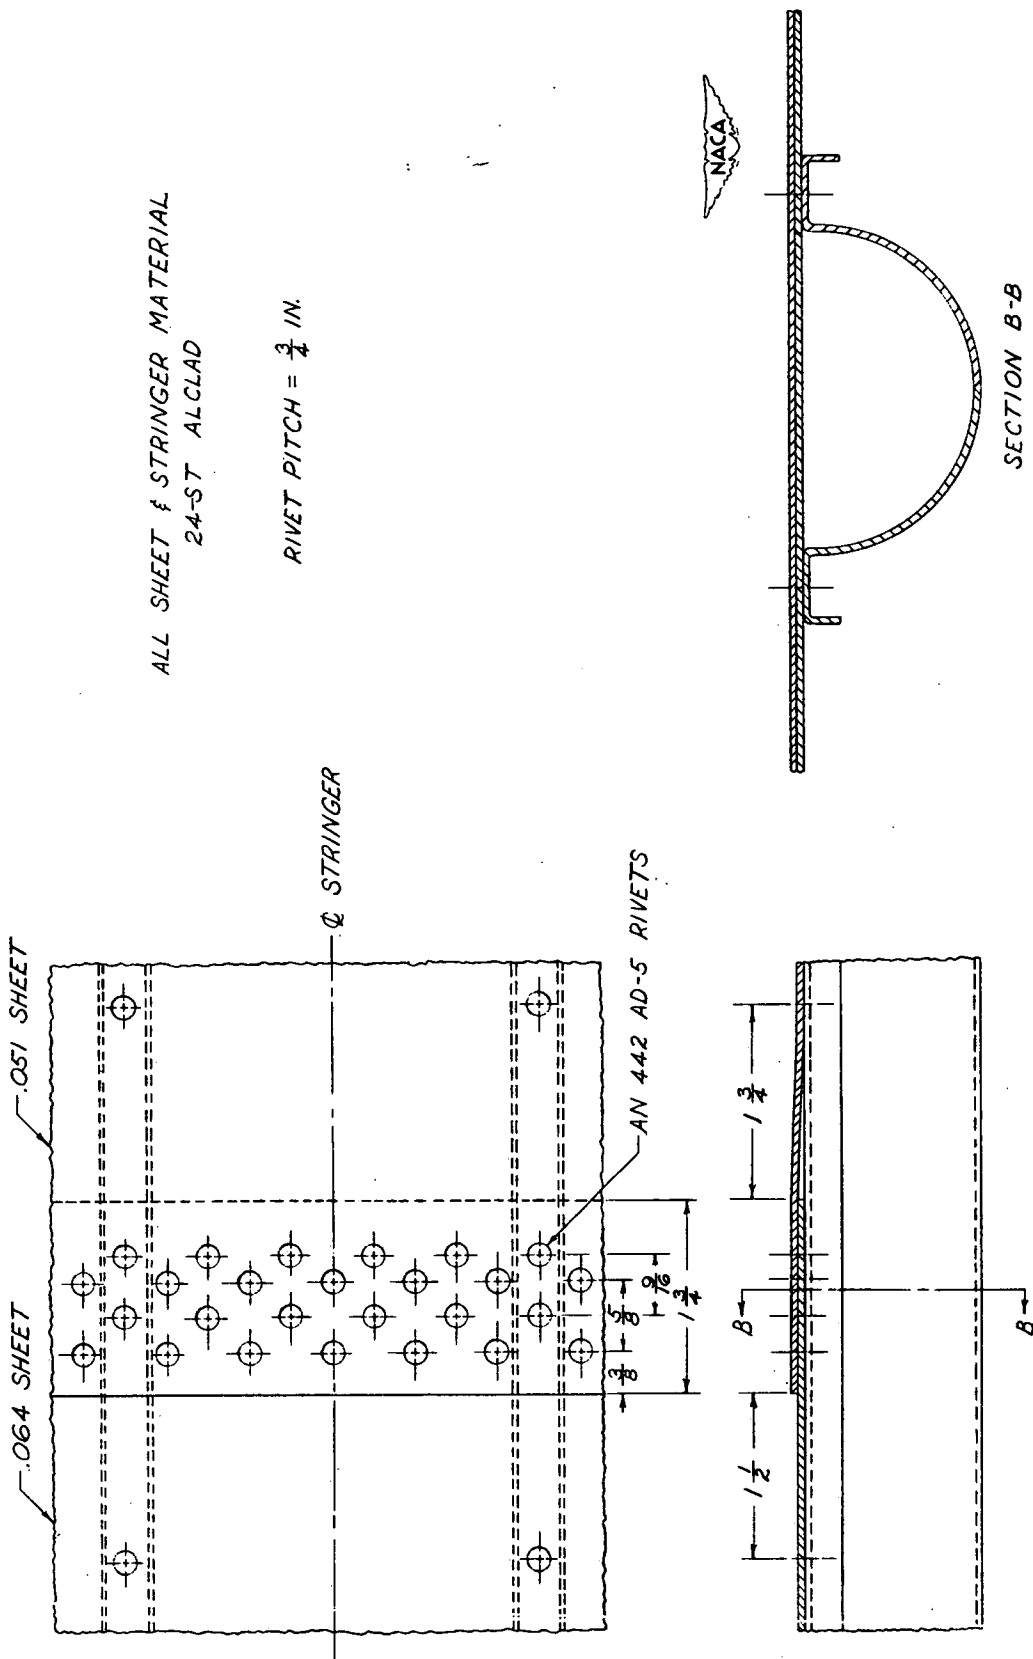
Details of riveted joint where cracks 1, 2, and 11 originated.
